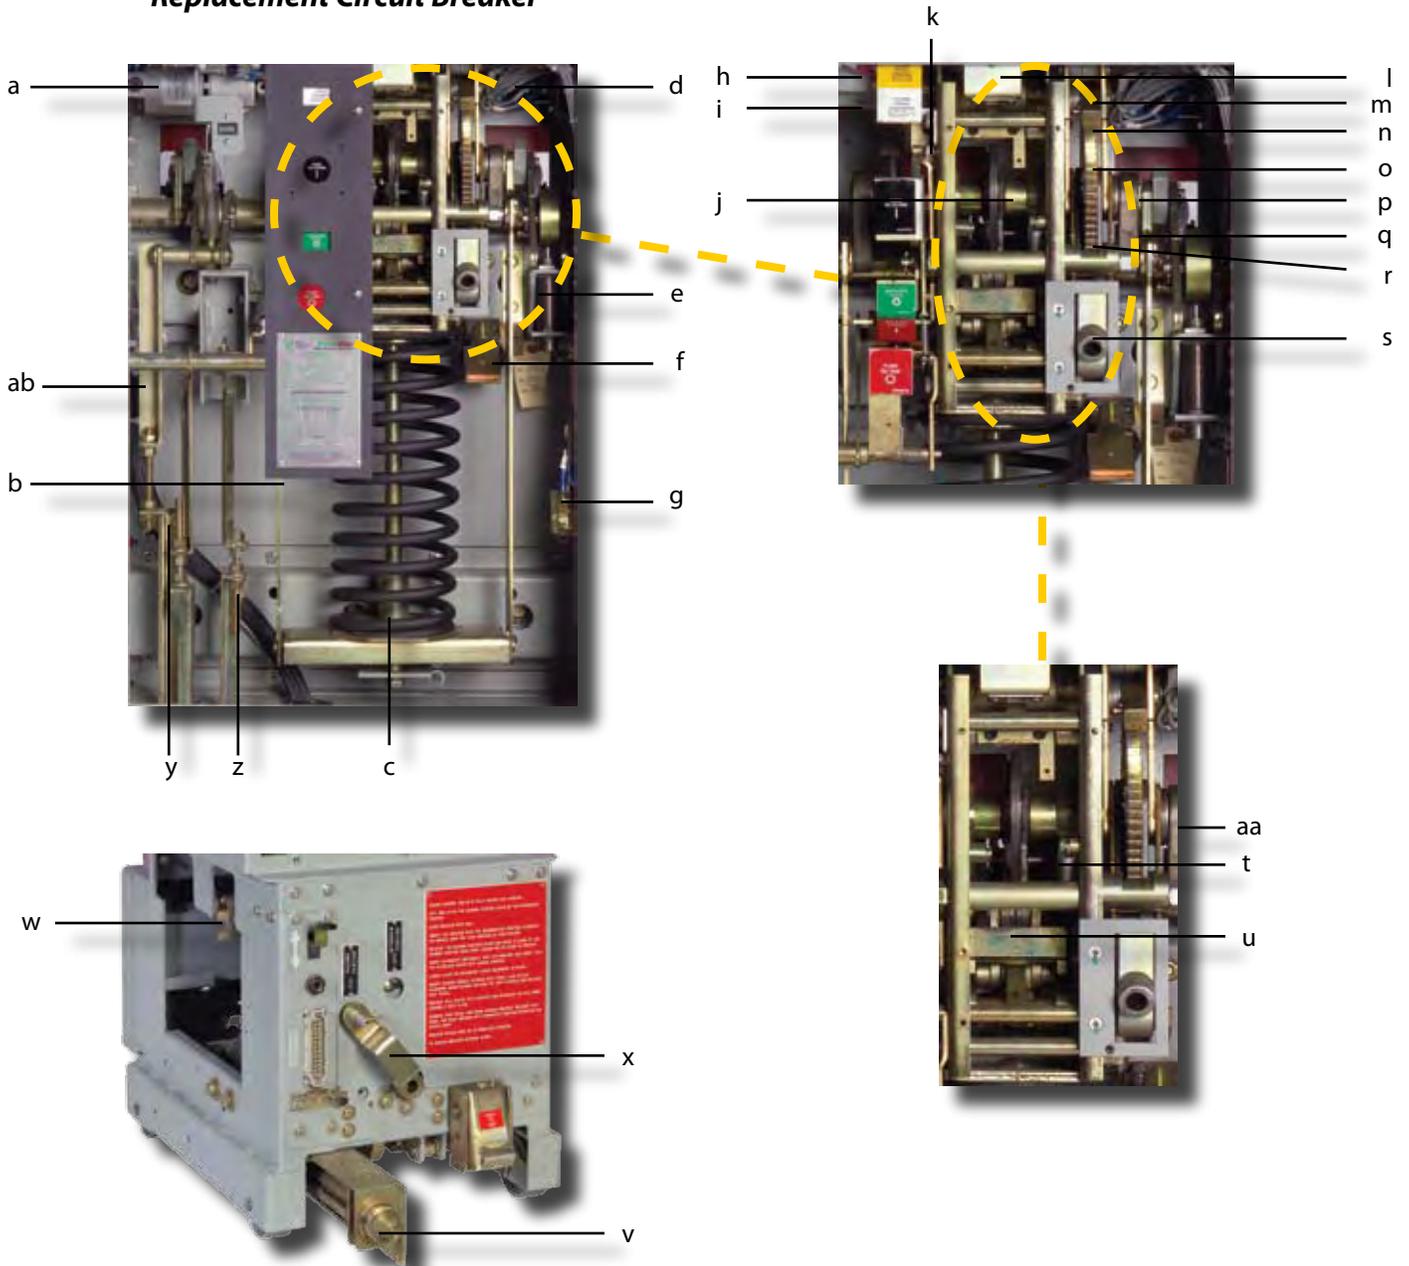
Front View PowlVac-ND MA Replacement Circuit Breaker with Cover
